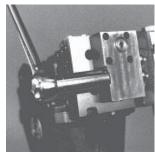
Remove E1•E2 or F1•F2 Control Solenoid
